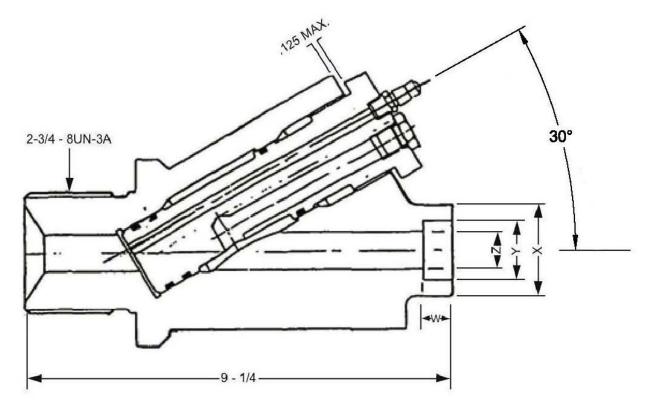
Type S inlet/drain plug for o-ring and welded assemblies.
